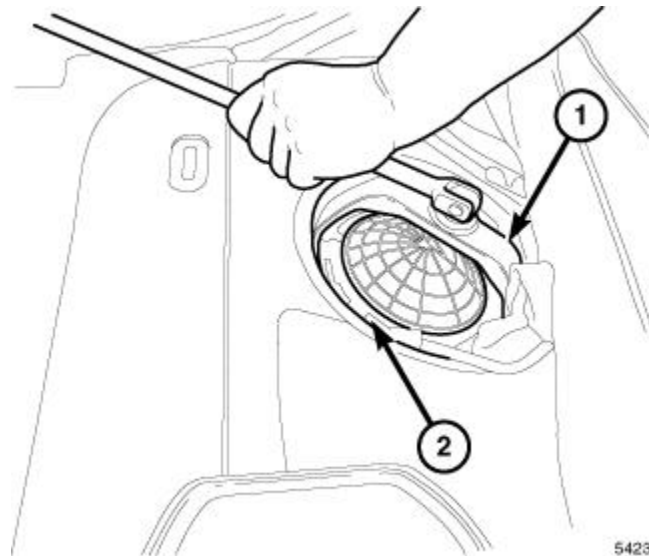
Fuel Pump Lock Ring Wrench & Lock Ring
